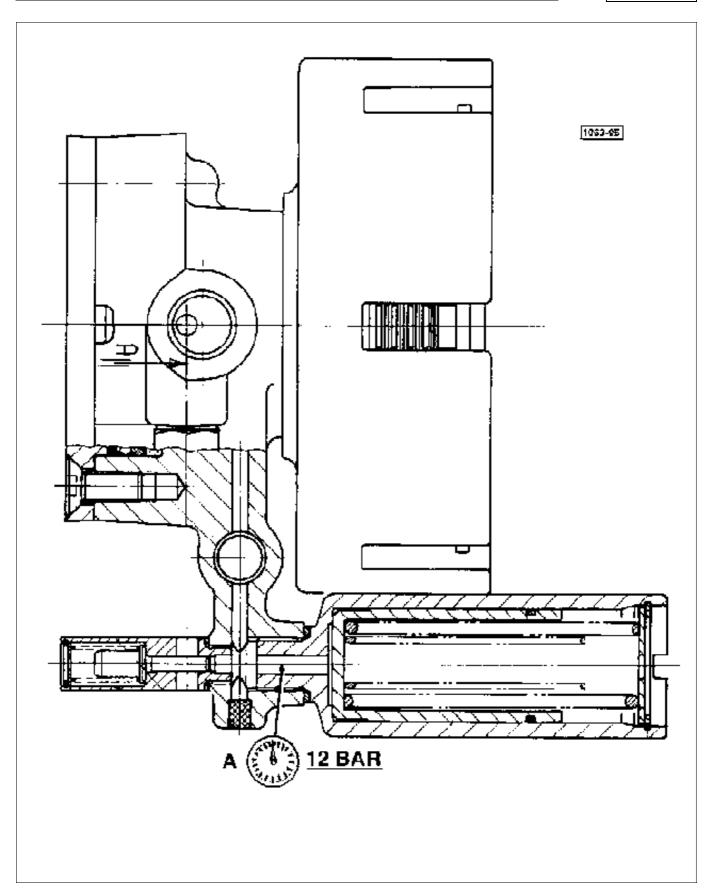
Operating pressure control valve for mechanically or electrohydrauliclly operated P.T.O. clutch assembly. A - Gauge utilized to check operating pressure in the P.T.O. circuit.
